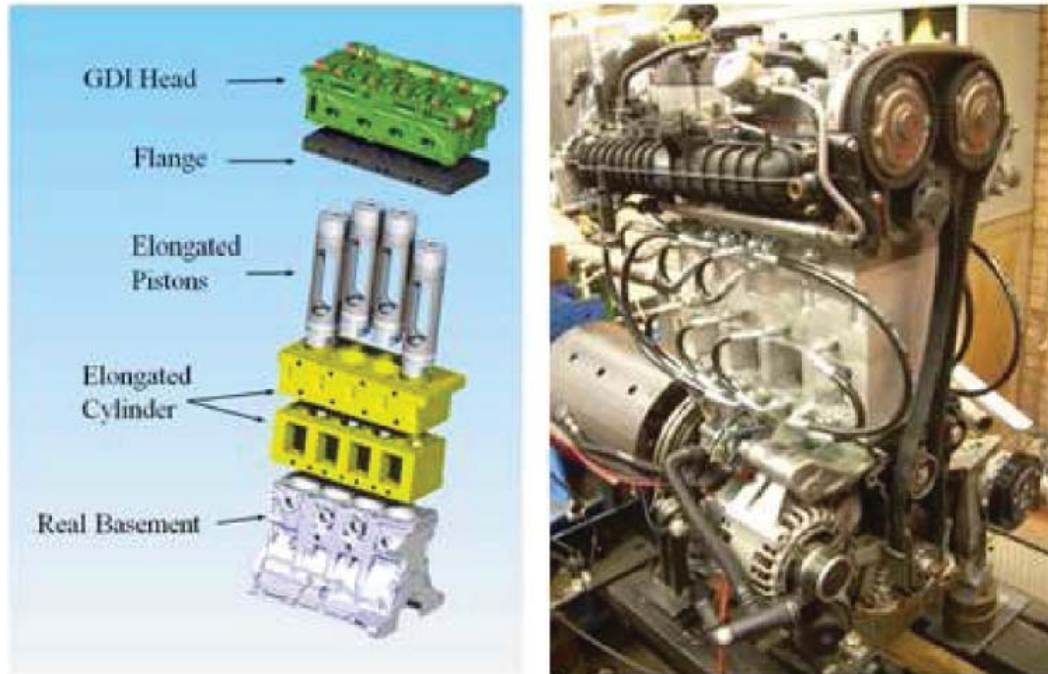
Exploded View and Photo of the Optical Accessible Engine on the Test Bench.¹
